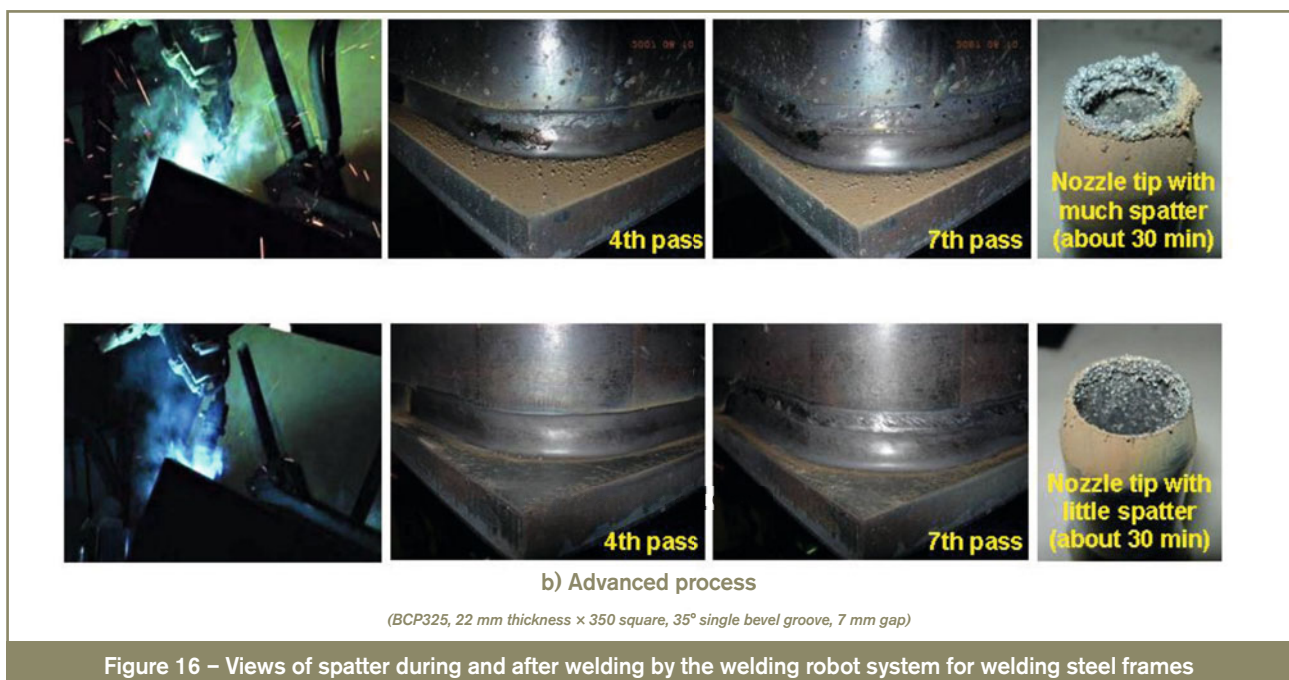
Views of spatter during and after welding by the welding robot system for welding steel frames
